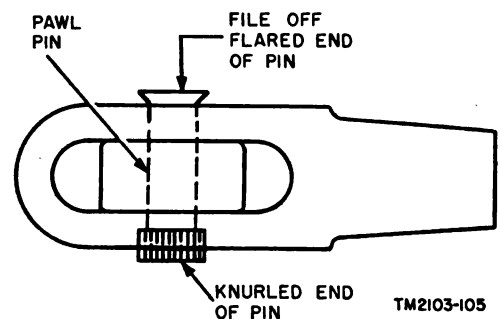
Emergency method of replacing defective rotary pawl and pawl pin.
